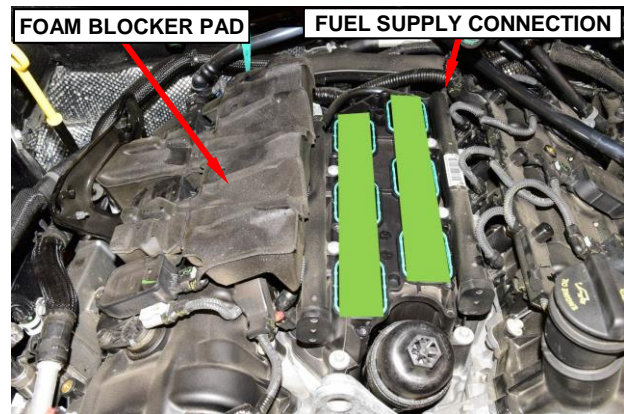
Intake Manifold Gaskets and Fuel Rail Crossover Tube Inspection
